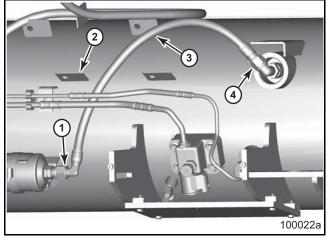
Fuel Fill Line at Mechanical Fill Valve and Bracket (E-Series Under Vehicle Tank Shown)
